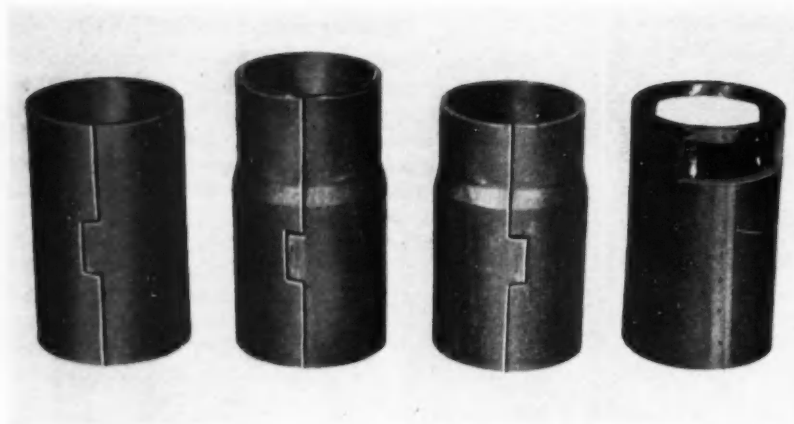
A—Here are the basic steps in the cold-forming of generator frames. Roll-up of strip stock into cylindrical form with a lap joint is as seen at the left. Major extrusion of one end is shown next. The frame at right represents former practice.
